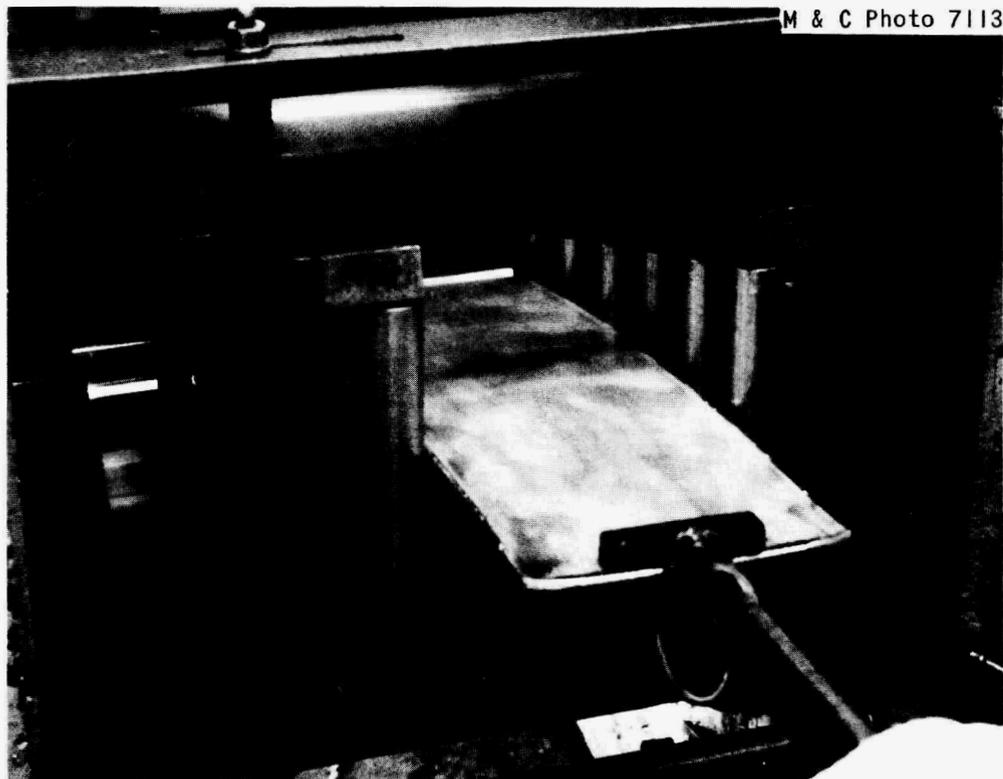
Entry Side of Hot-Rolling Mill, Showing Plate Being Fed Between Roll Guides.
